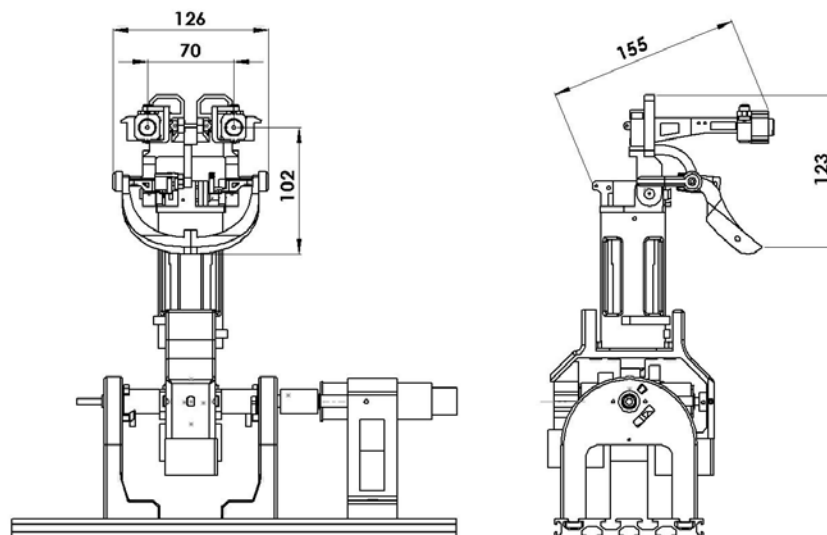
Major Dimensions of the Manufactured Robotic Head.
